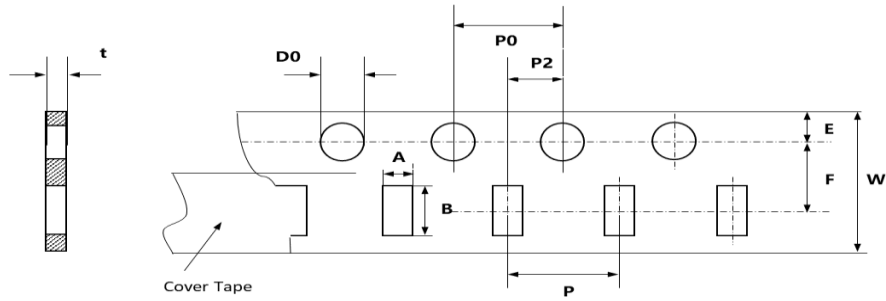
0603, 0805, 1206, 1210 (Paper tape)
